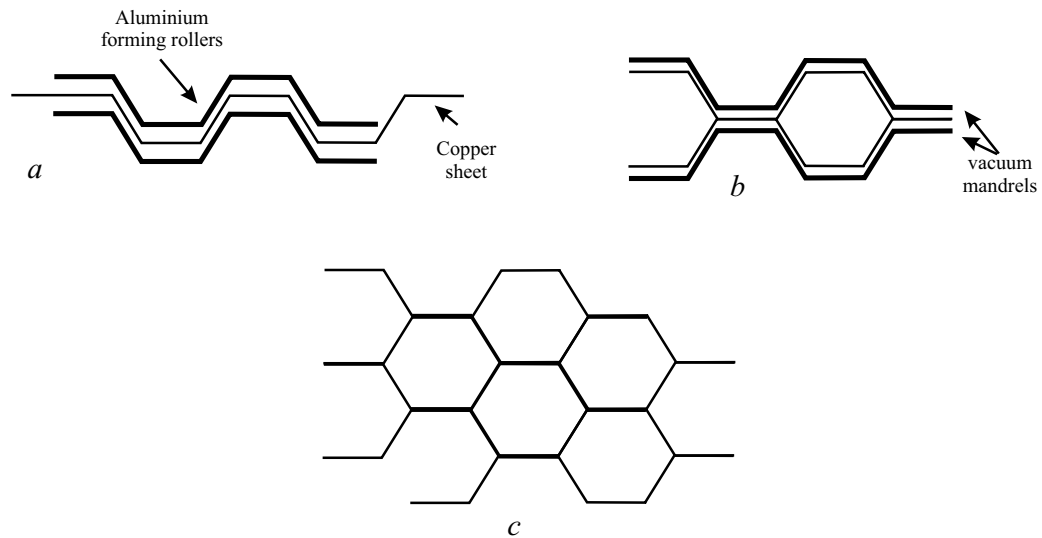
Principle steps in the manufacture of a *J-PEX* collimator. (a) Copper sheets pressed into shape between metal rollers. (b) Formed sheets held onto positioning mandrels by vacuum, and epoxied together. (c) Single honeycomb wafers epoxied to form complete collimator structure.
